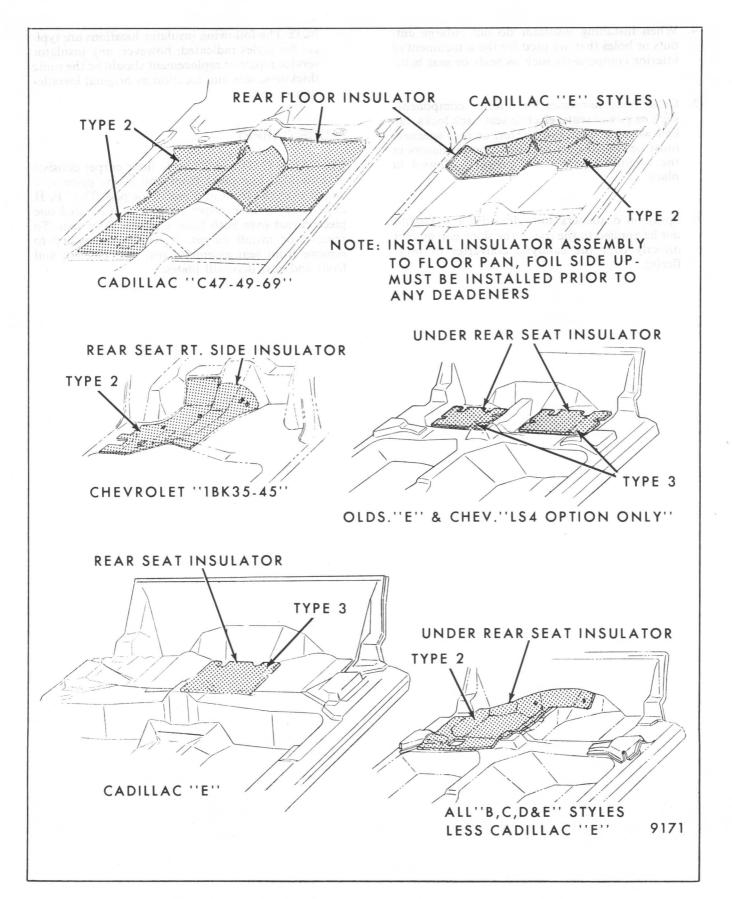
Rear Floor and Rear Seat Pan Insulators
